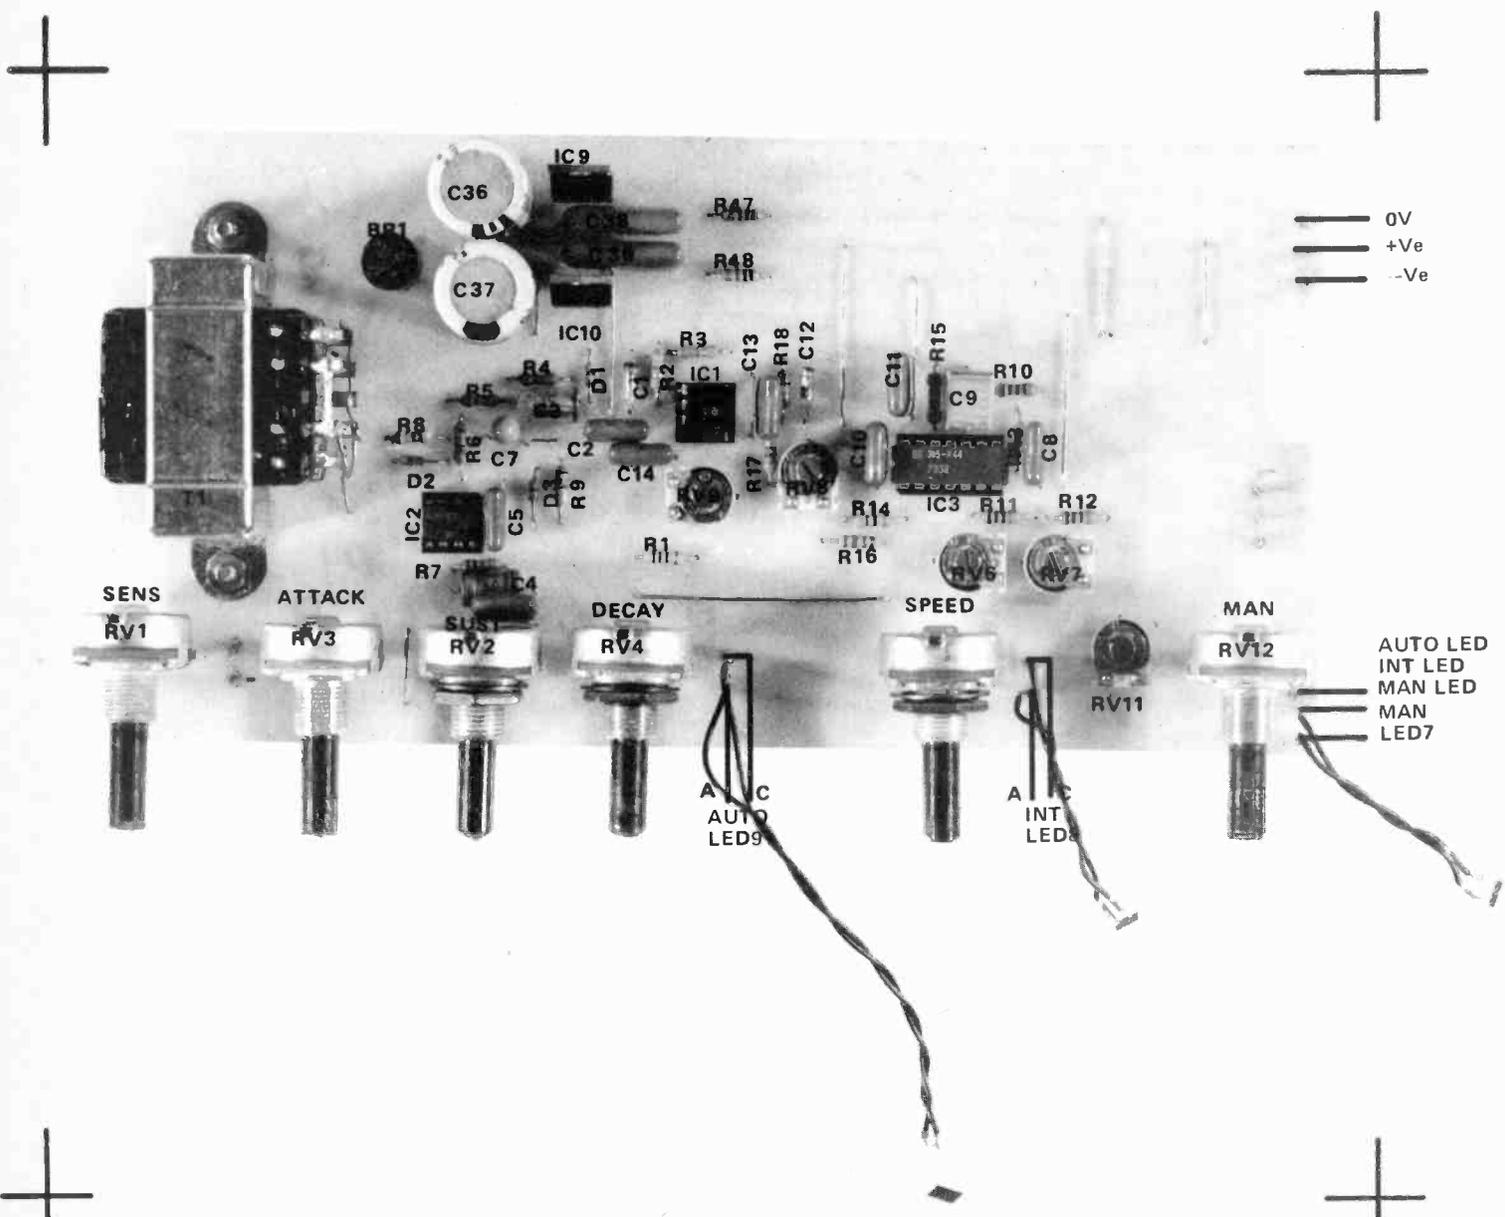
Component Overlay for the single sided board, which carries the power supply.
